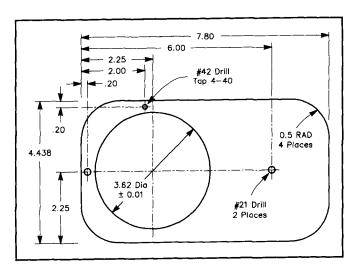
The plate stripline is made from brass sheet, $^{1}\!/_{16}\text{-in.}$ (0.063-in.) thick. Dimensional tolerance is \pm 0.02 in., except the cutout for the anode fingerstock, as noted on the drawing.
